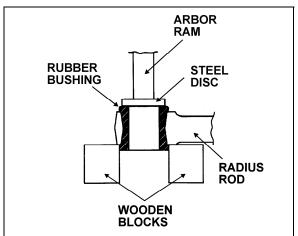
RADIUS ROD BUSHING REMOVAL
